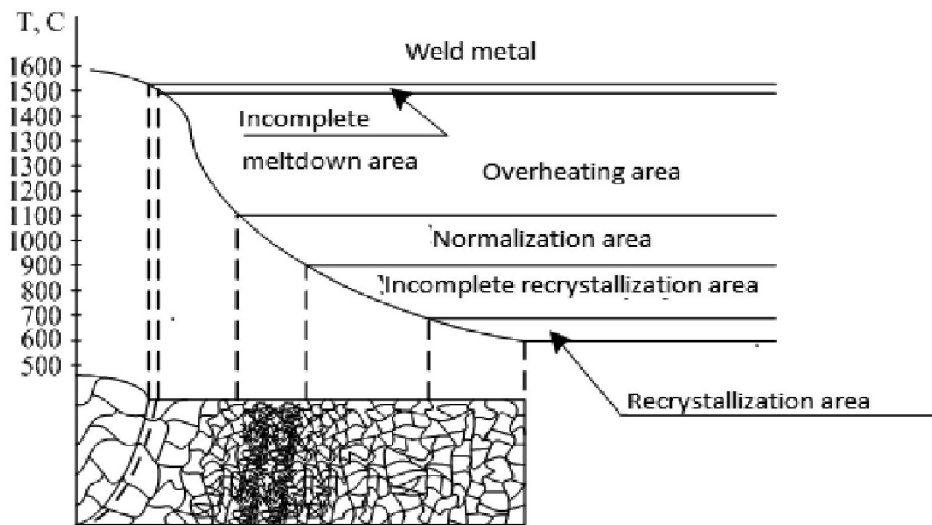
Structural scheme of the weld-affected zone in welded connection
